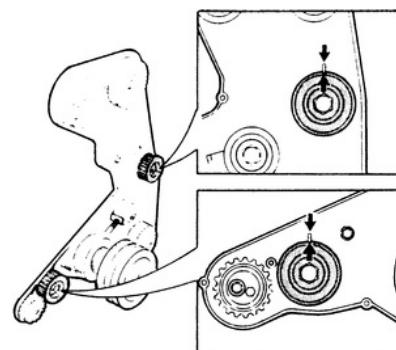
Check the alignment of the balance shafts and crankshaft before tightening the tensioner
